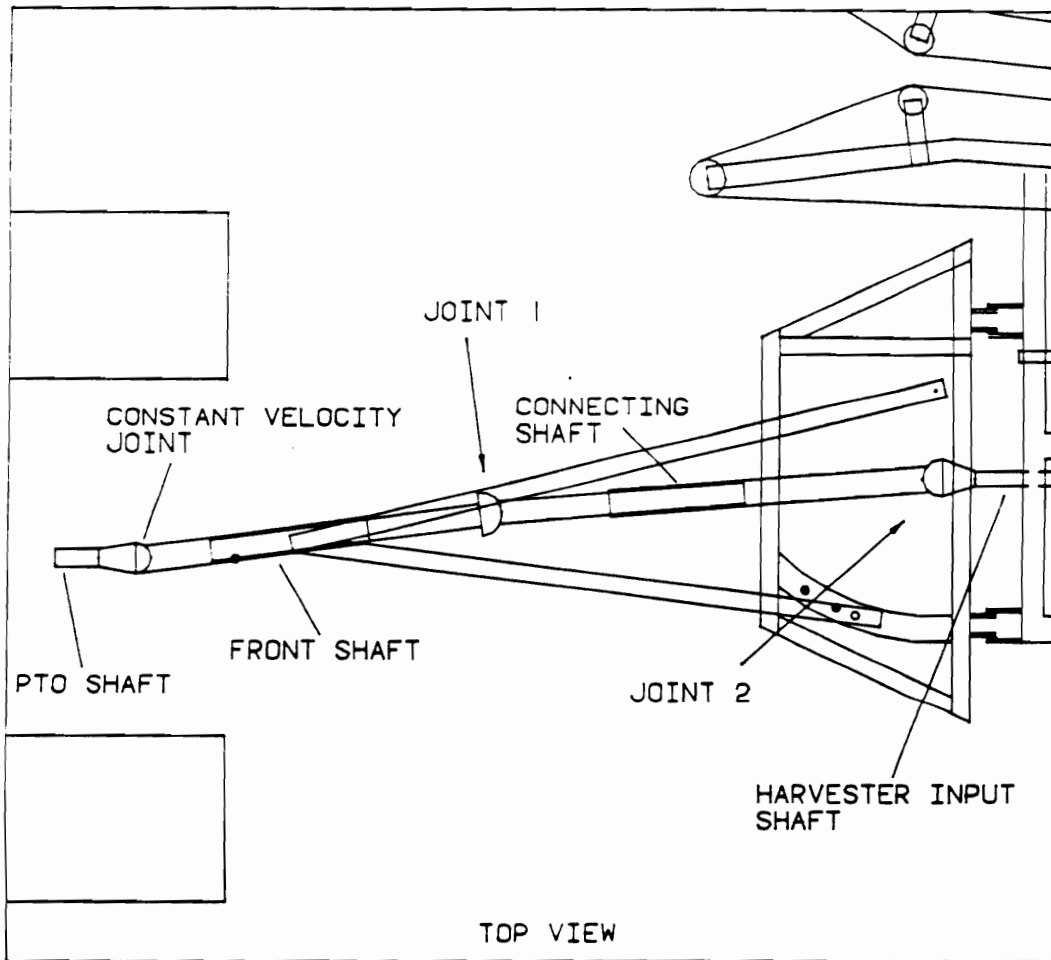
Top view of 3-joint universal driveline with each shaft defined
